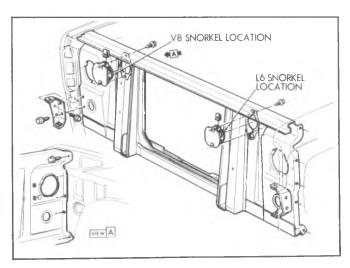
C-11--Carburetor Outside Air Inlet Snorkels—CK Series
